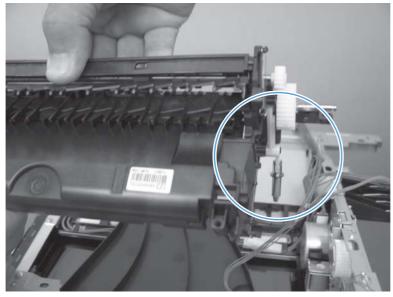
Reinstall the delivery assembly (1 of 2)
